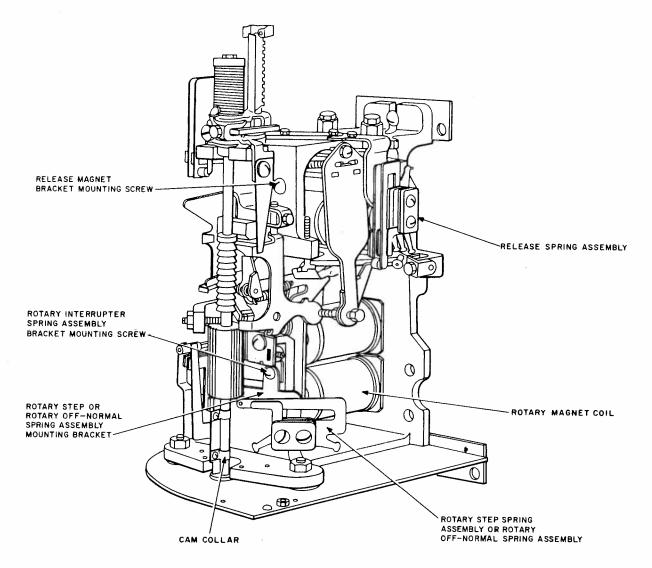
Parts of 197-Type Switch as Viewed From the Right Side
